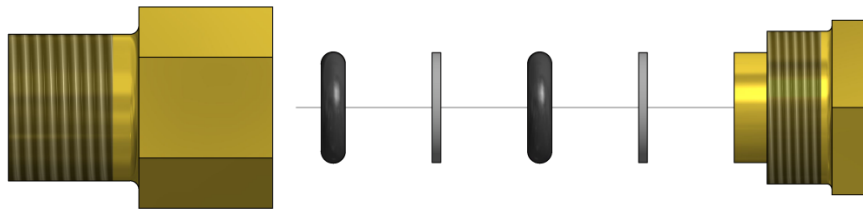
Proper Installation of Washers and O-rings in the Packing Gland
